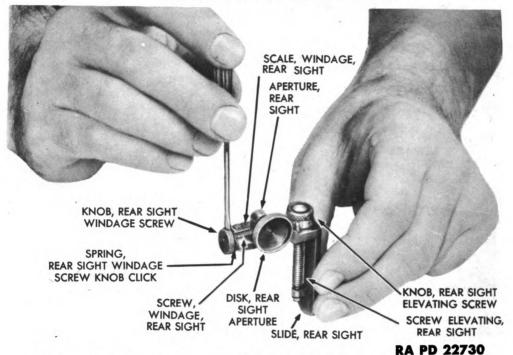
Removing Rear Sight Windage Screw Knob From Rear Sight of U.S. Rifle, Cal. .22, M2
